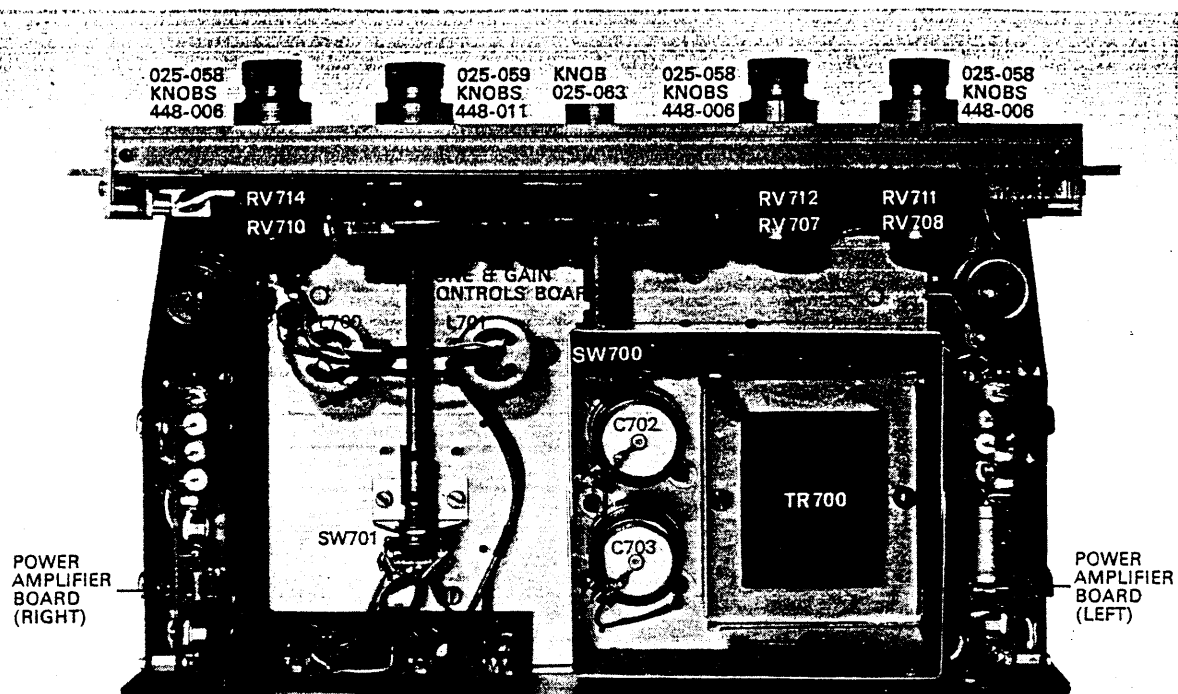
AMPLIFIER CHASSIS — TOP VIEW
